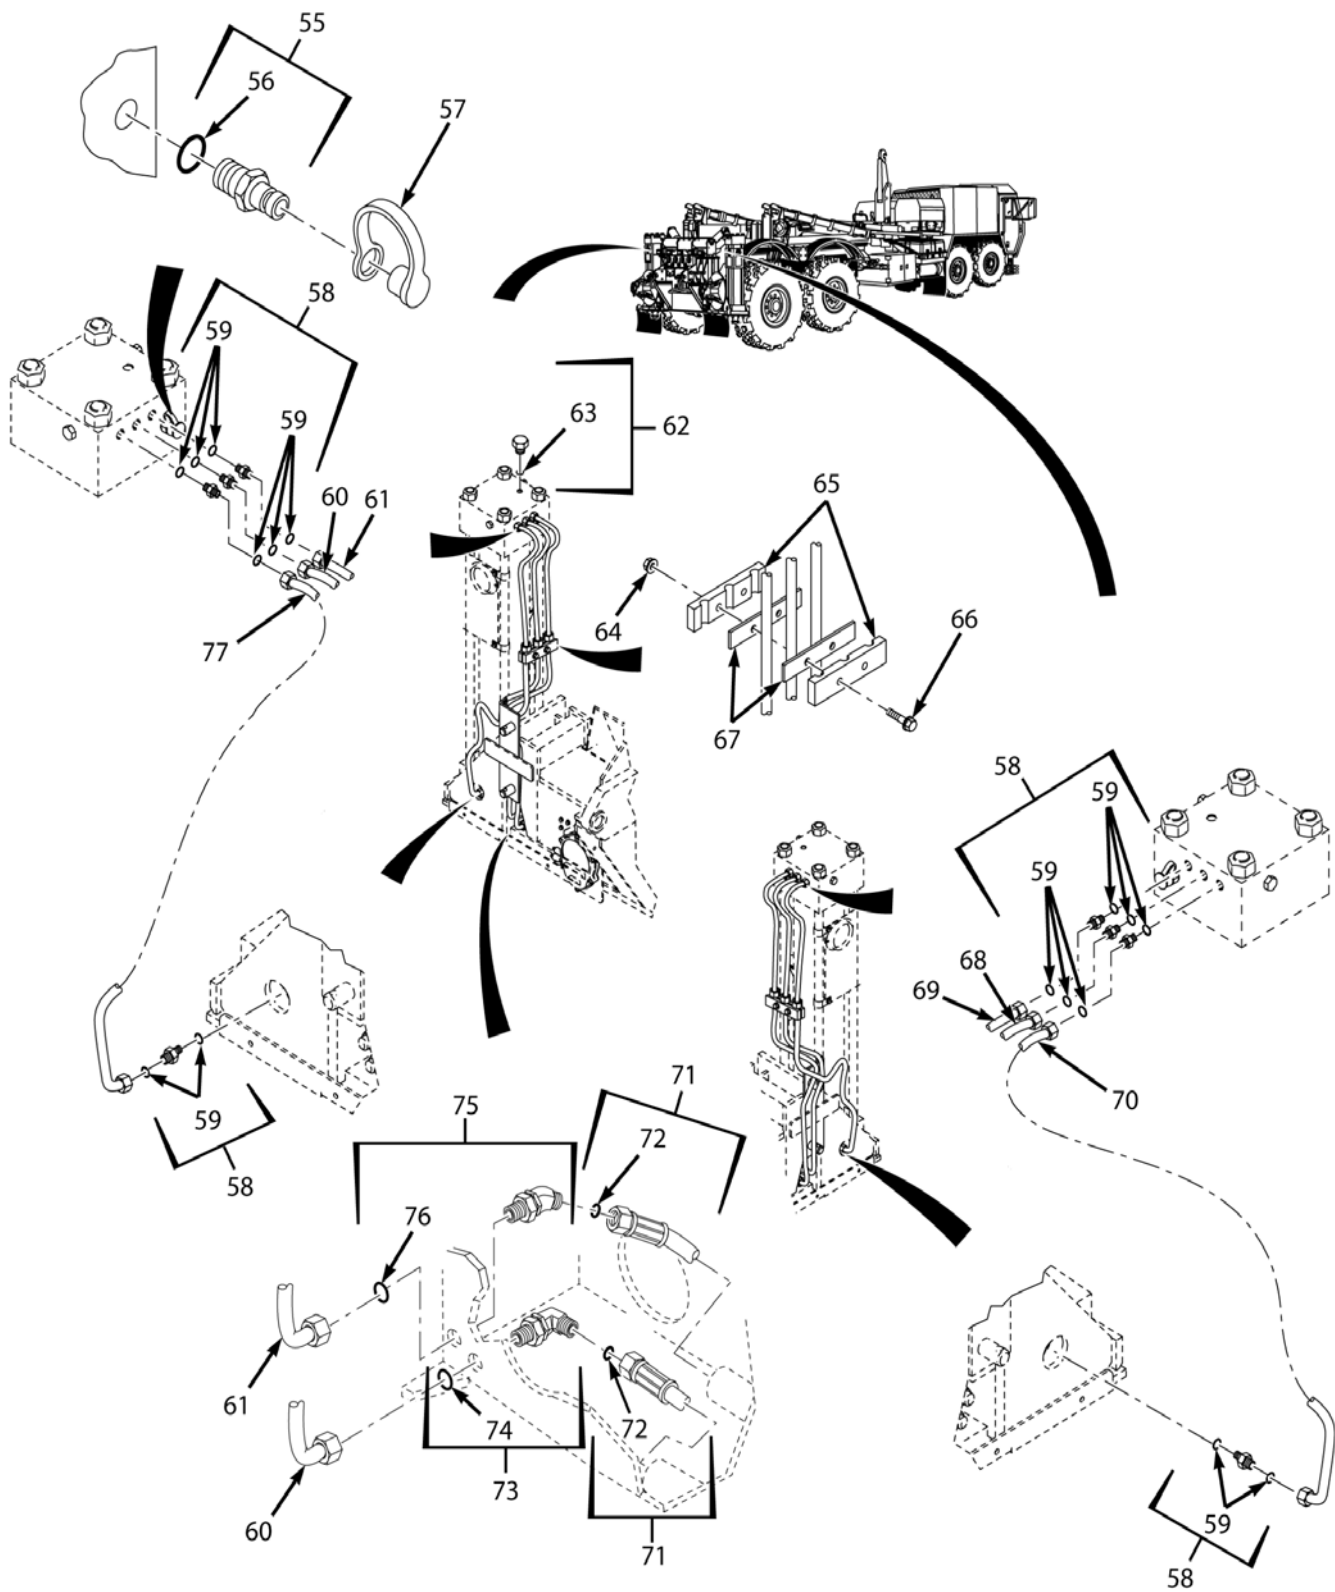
OUTRIGGER HYDRAULIC LINES AND FITTINGS (SHEET 3 OF 4)
